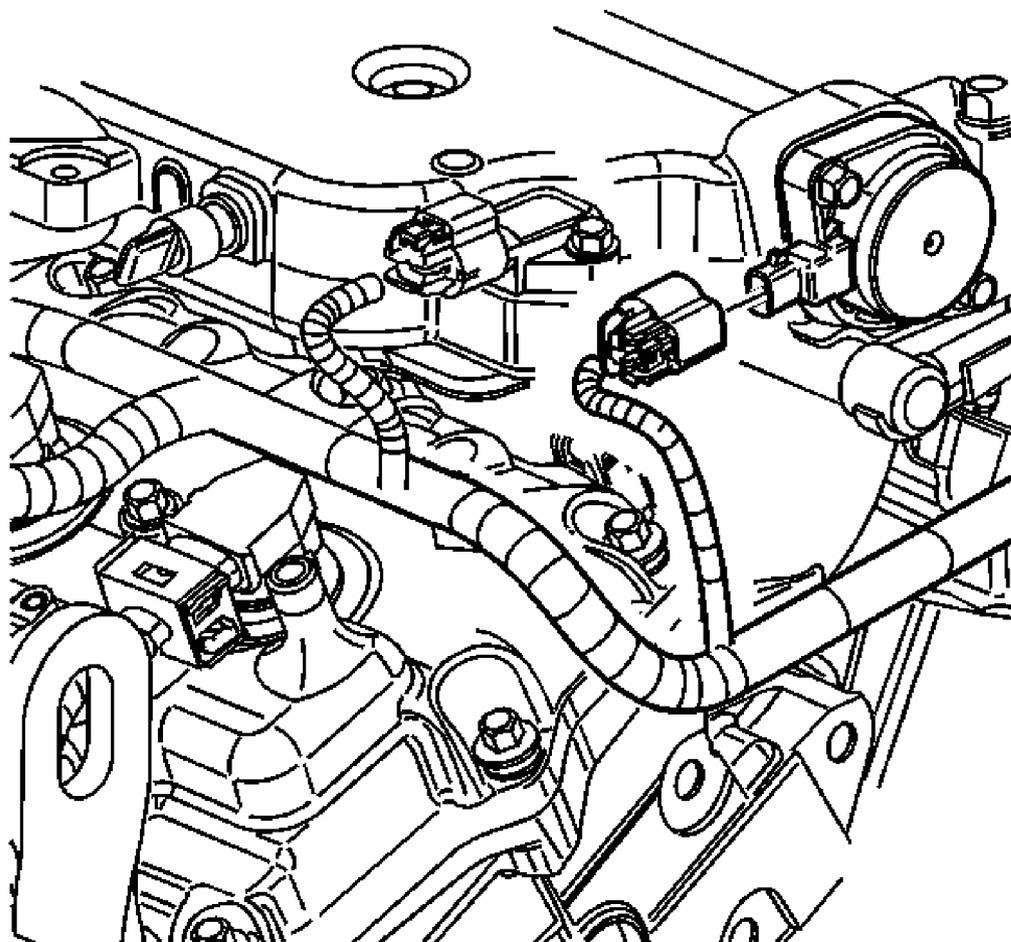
View Of Communicator And Intake Manifold Runner Control Solenoid Electrical Connectors
